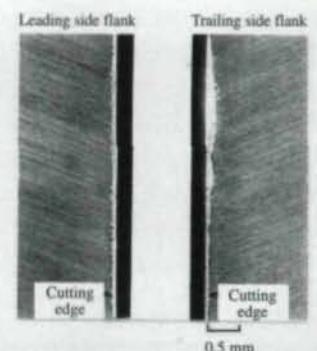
Wear patterns on flank of Hob G after cutting seven carburized gears.
